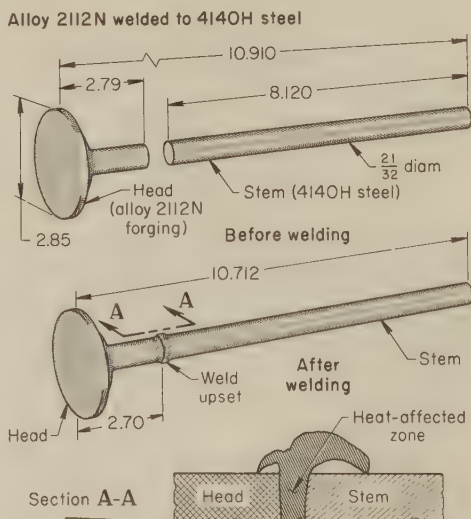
Diesel-engine exhaust valve that was made by friction welding a heat-resisting alloy to a low-alloy steel (Example 455)
